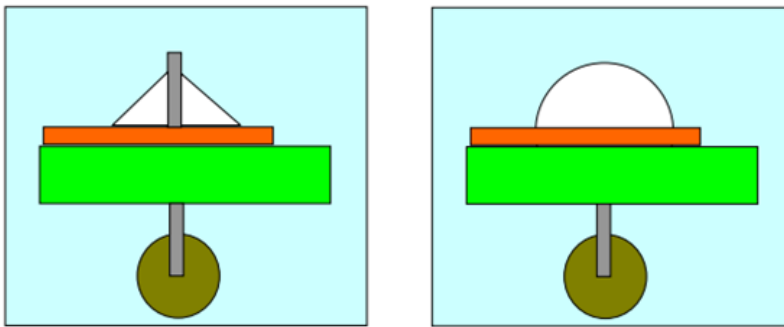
Traditional type of solder fillet on left / HV type solder ball on right (Tarzwell & Bahl 2004)
